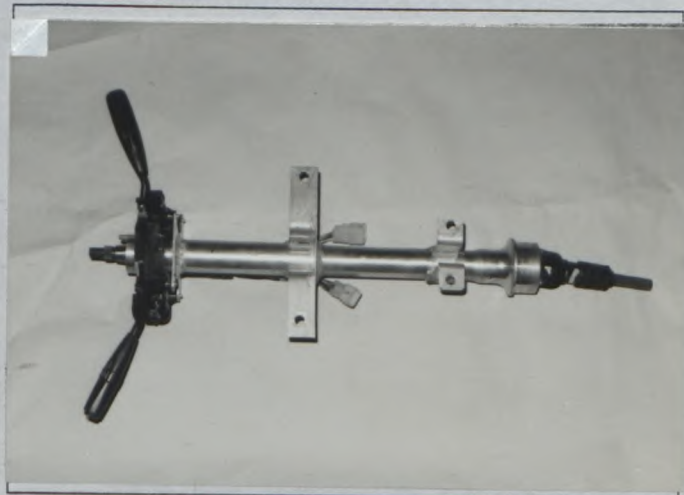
REINFORCED STEERING COLUMN, TYPE B
